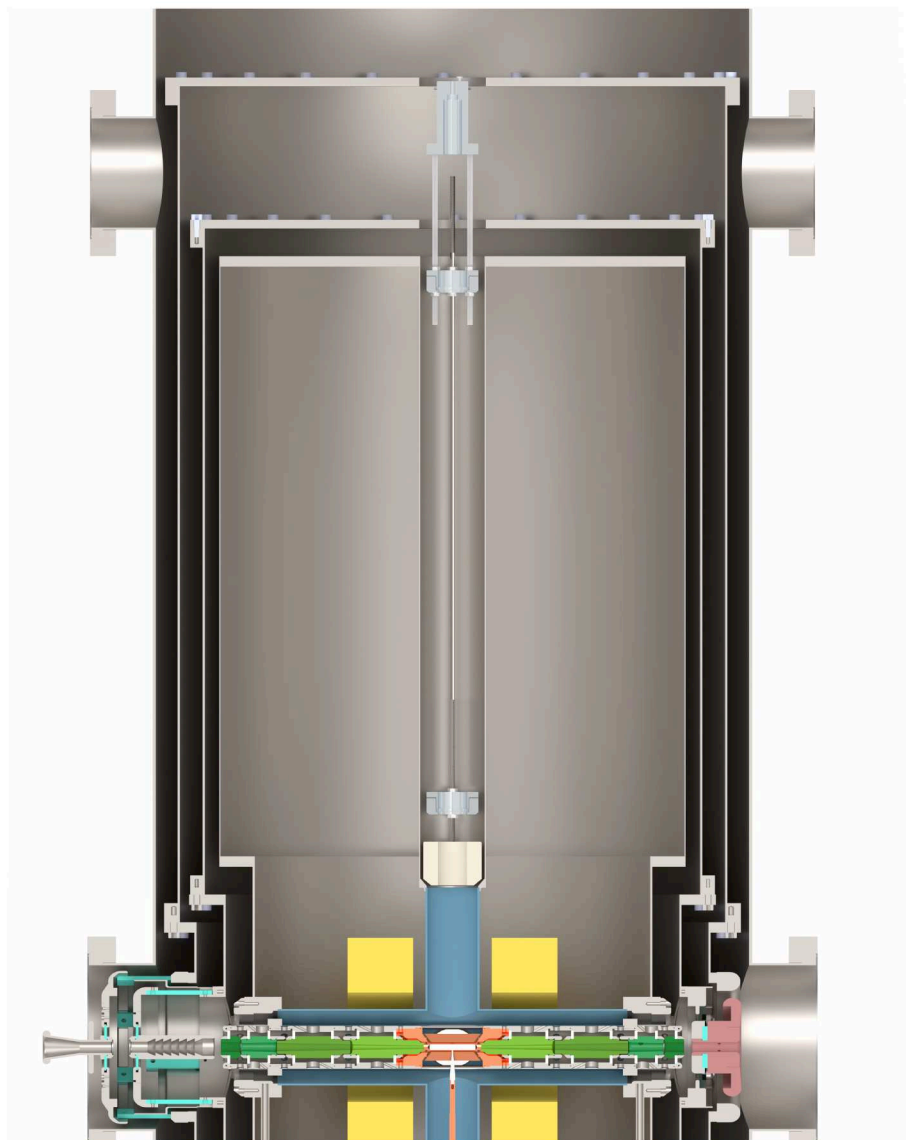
Cross sectional view of the lens assembly in the HD-EBIT
